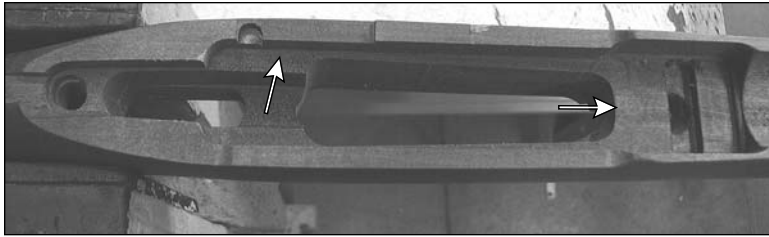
A: Mauser receiver inletting is flat on bottom and sides.
